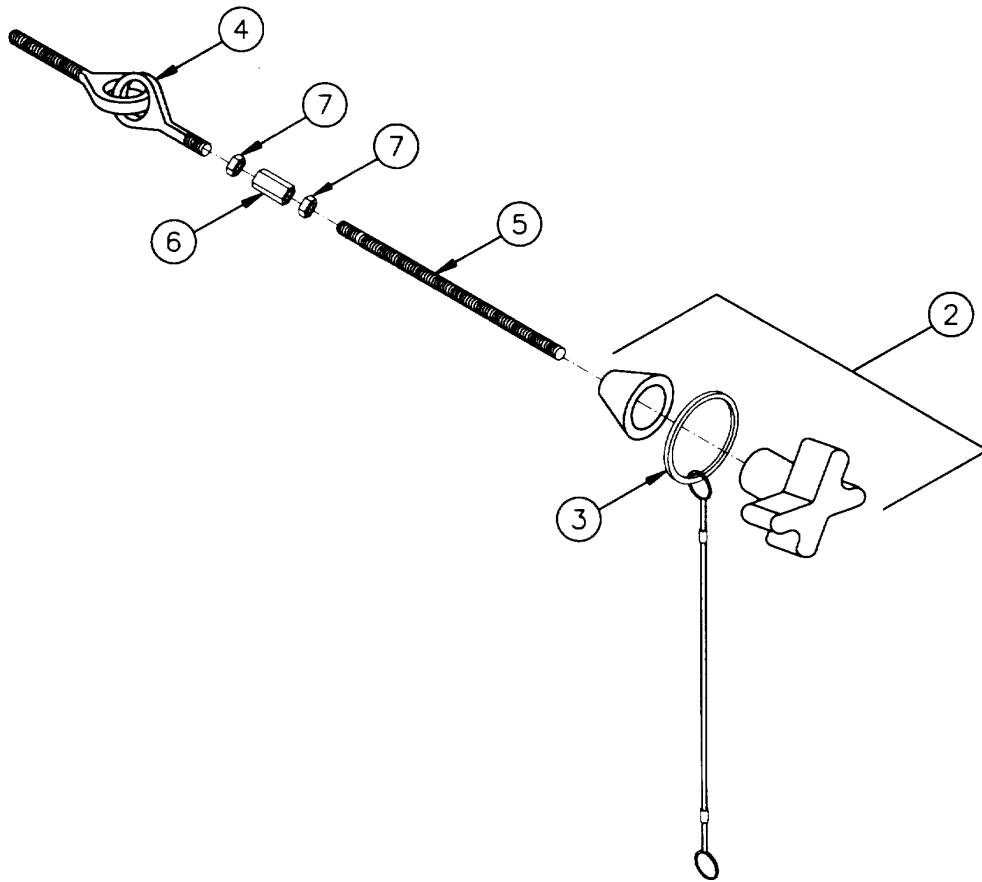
KNOB ASSEMBLY, CABLE REEL
